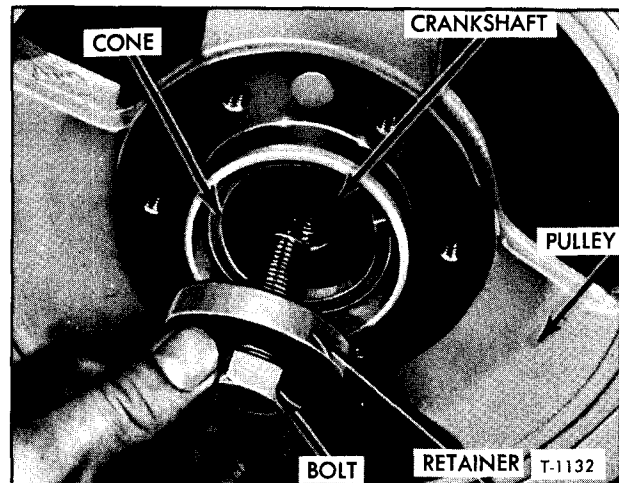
Crankshaft Hub Retaining Parts (Typical)
